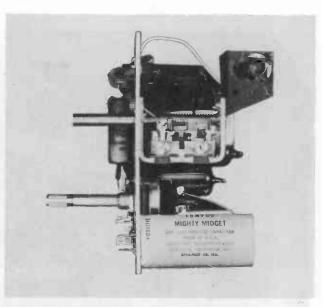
Side View of Motorola Radio Chassis Illustrating Thinness of Chassis Base.
